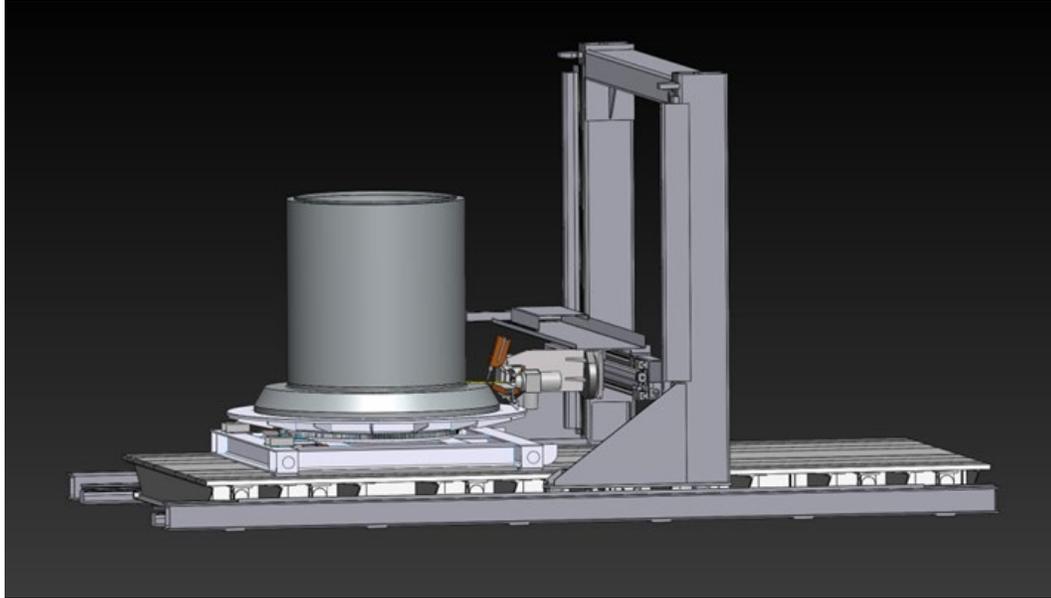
Girth weld joining the lower flange to the lower flange shell
